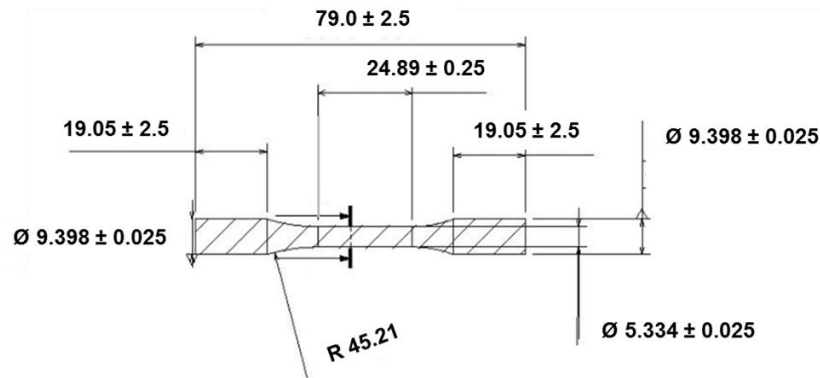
Fatigue test specimens – first design. Dimensions are in millimeters.
